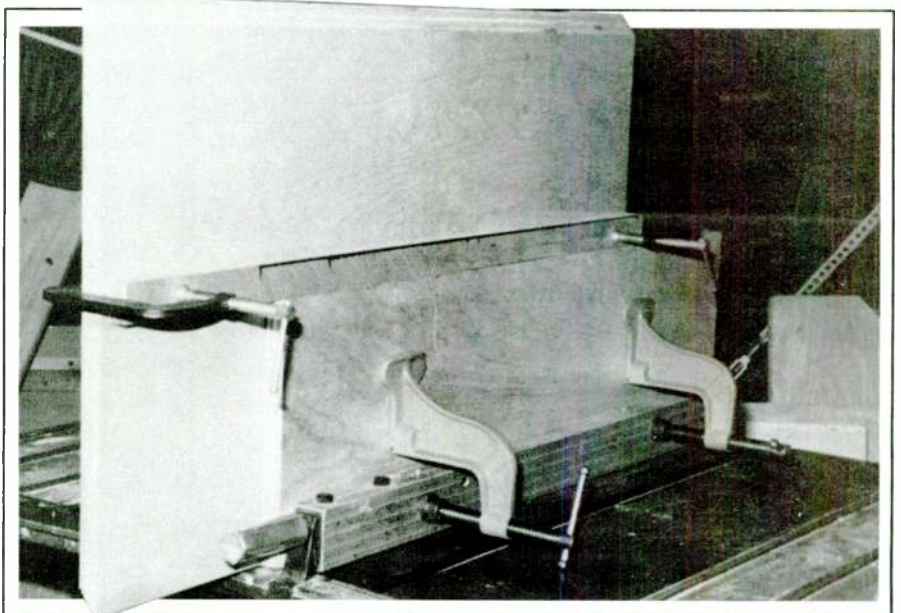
Auxiliary fence for table saw to aid cutting part G.
